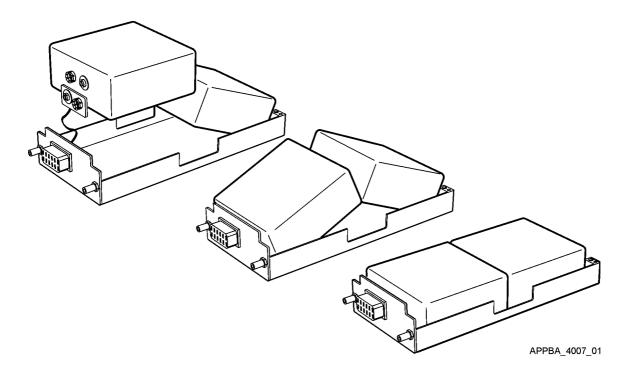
Install Rechargeable Batteries In Battery Carrier Assembly
